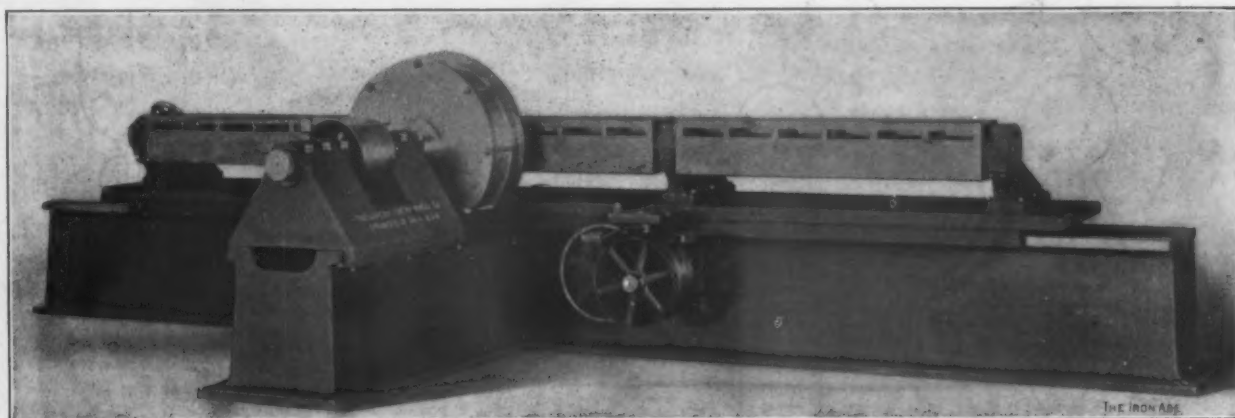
View from the Opposite Side of the New Automatic Shear Knife Grinder.
